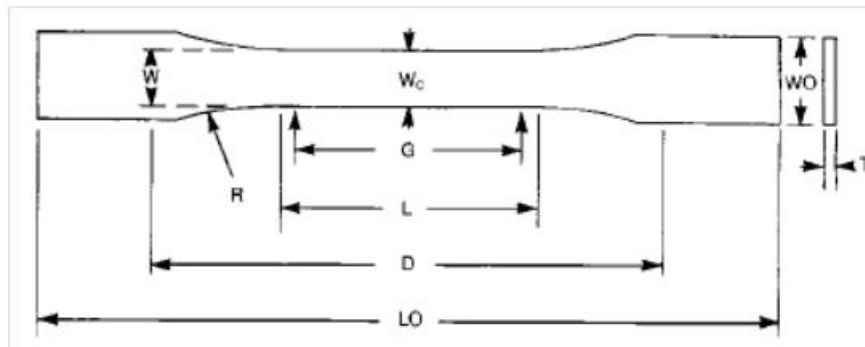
ASTM D638 Tabbed tensile specimen.
